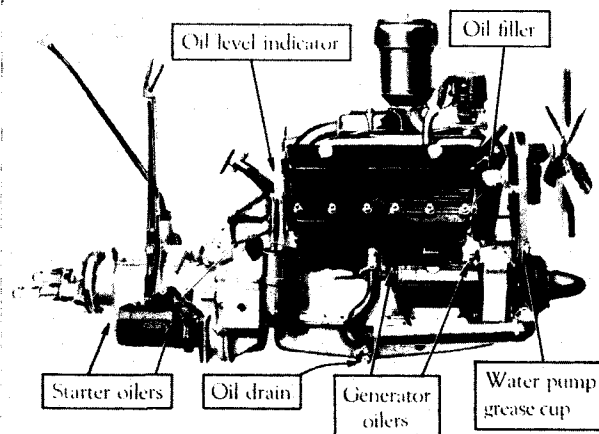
Showing the location of the oil filler, oil level indicator, oil pan drain plug and other lubrication features.
